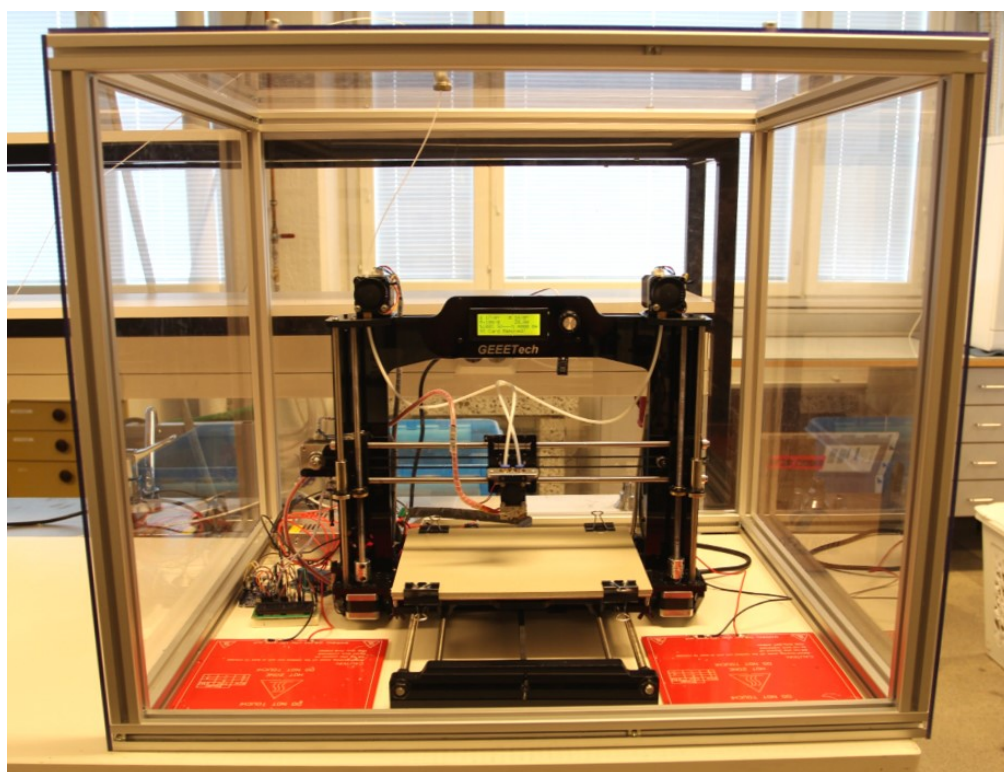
The gantry style desktop 3D printer used in the study. The entire printer assembly was placed in heated build chamber for more refined control of the atmosphere during deposition.
